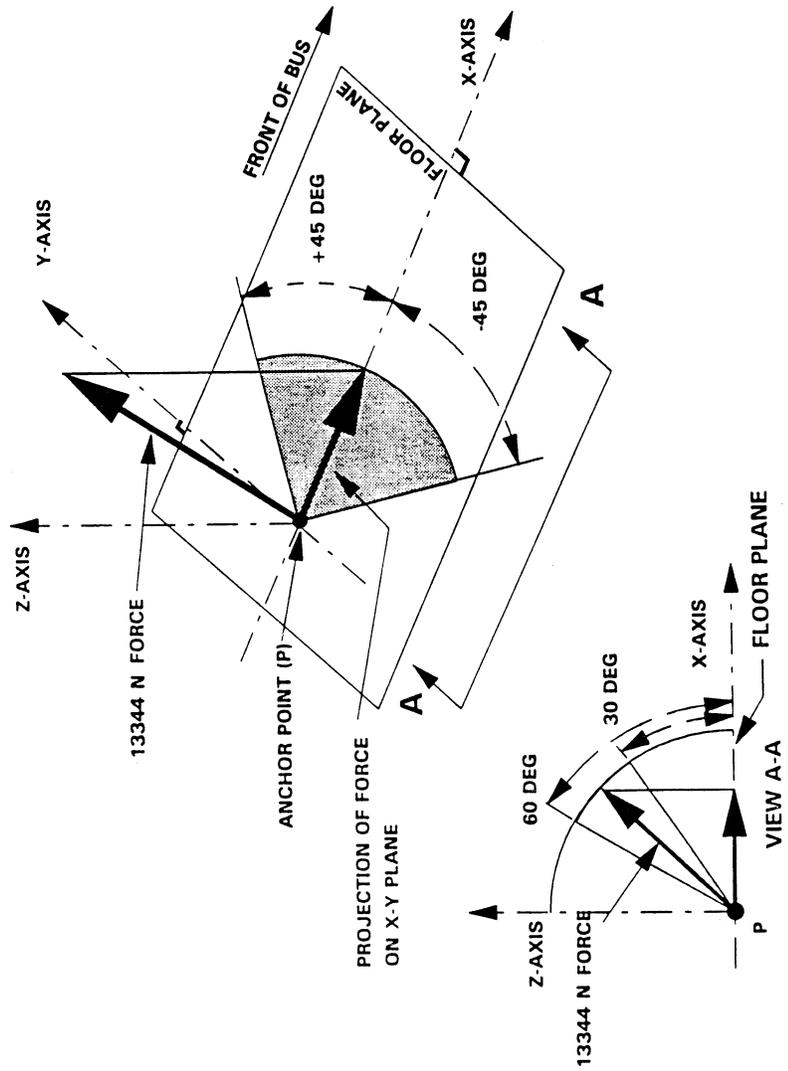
Wheelchair Securement Anchorage Loading Direction (Rear Anchorage Shown)
